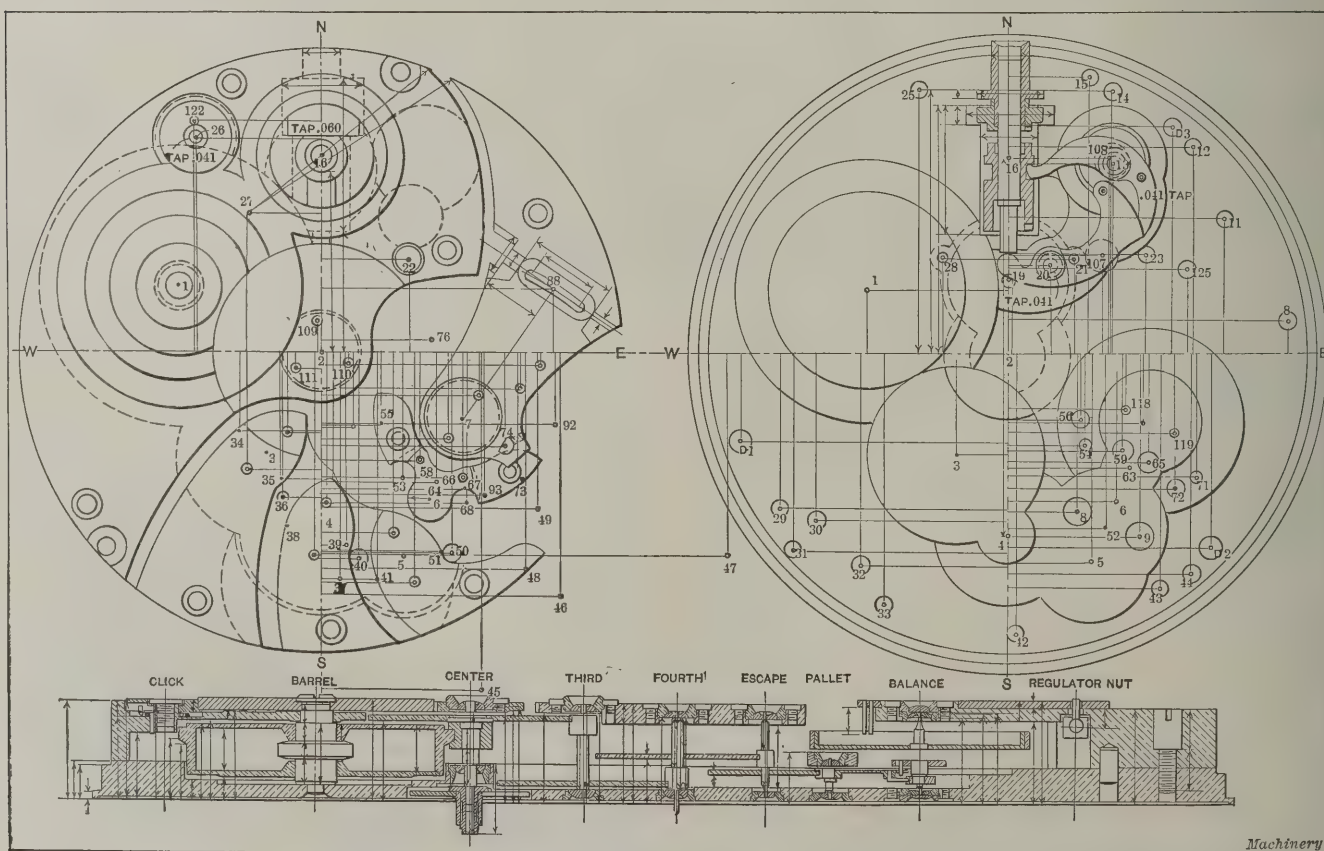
Plan and Developed Elevation Views of the 16-size South Bend Watch, Enlarged
